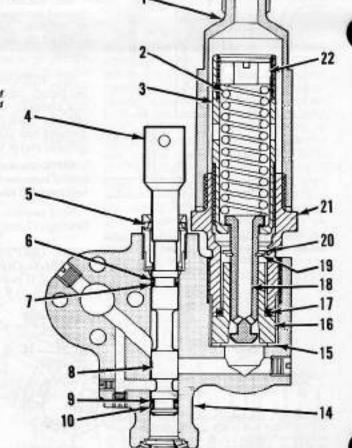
Sectional view of hydrautic oil control and flow control valve.
